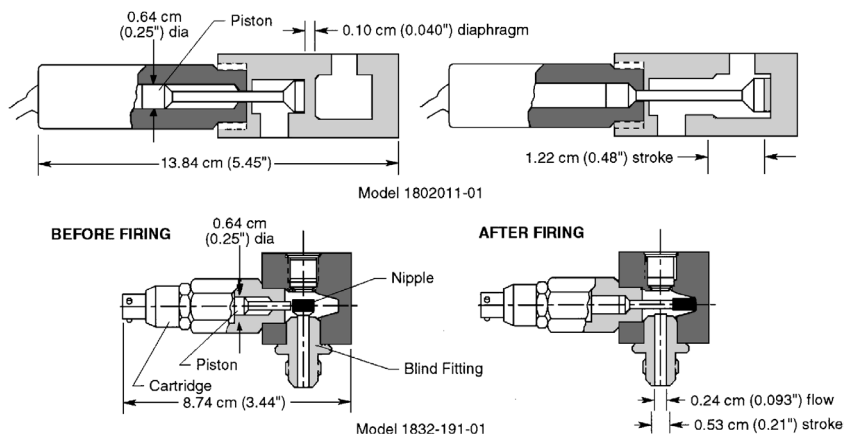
Cross-sectional view of Conax pyrovalves; bodies and blind fittings are aluminum.
